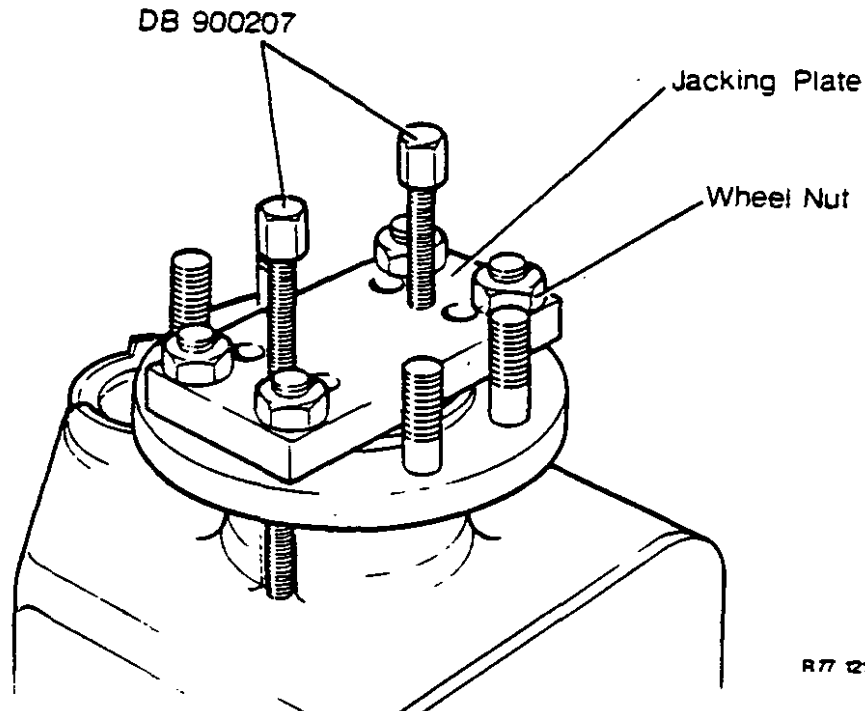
TOOL FOR REMOVING FINAL DRIVE SHAFT
